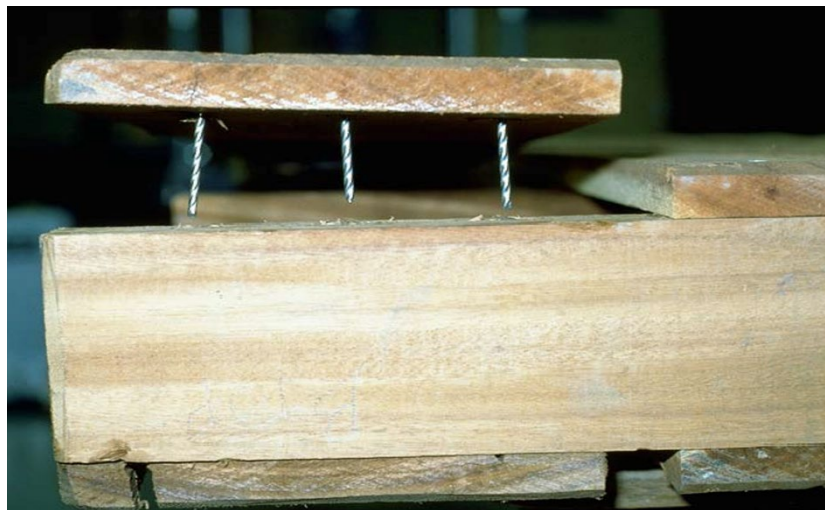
Showing fastener withdrawal causing pallet joint separation.
